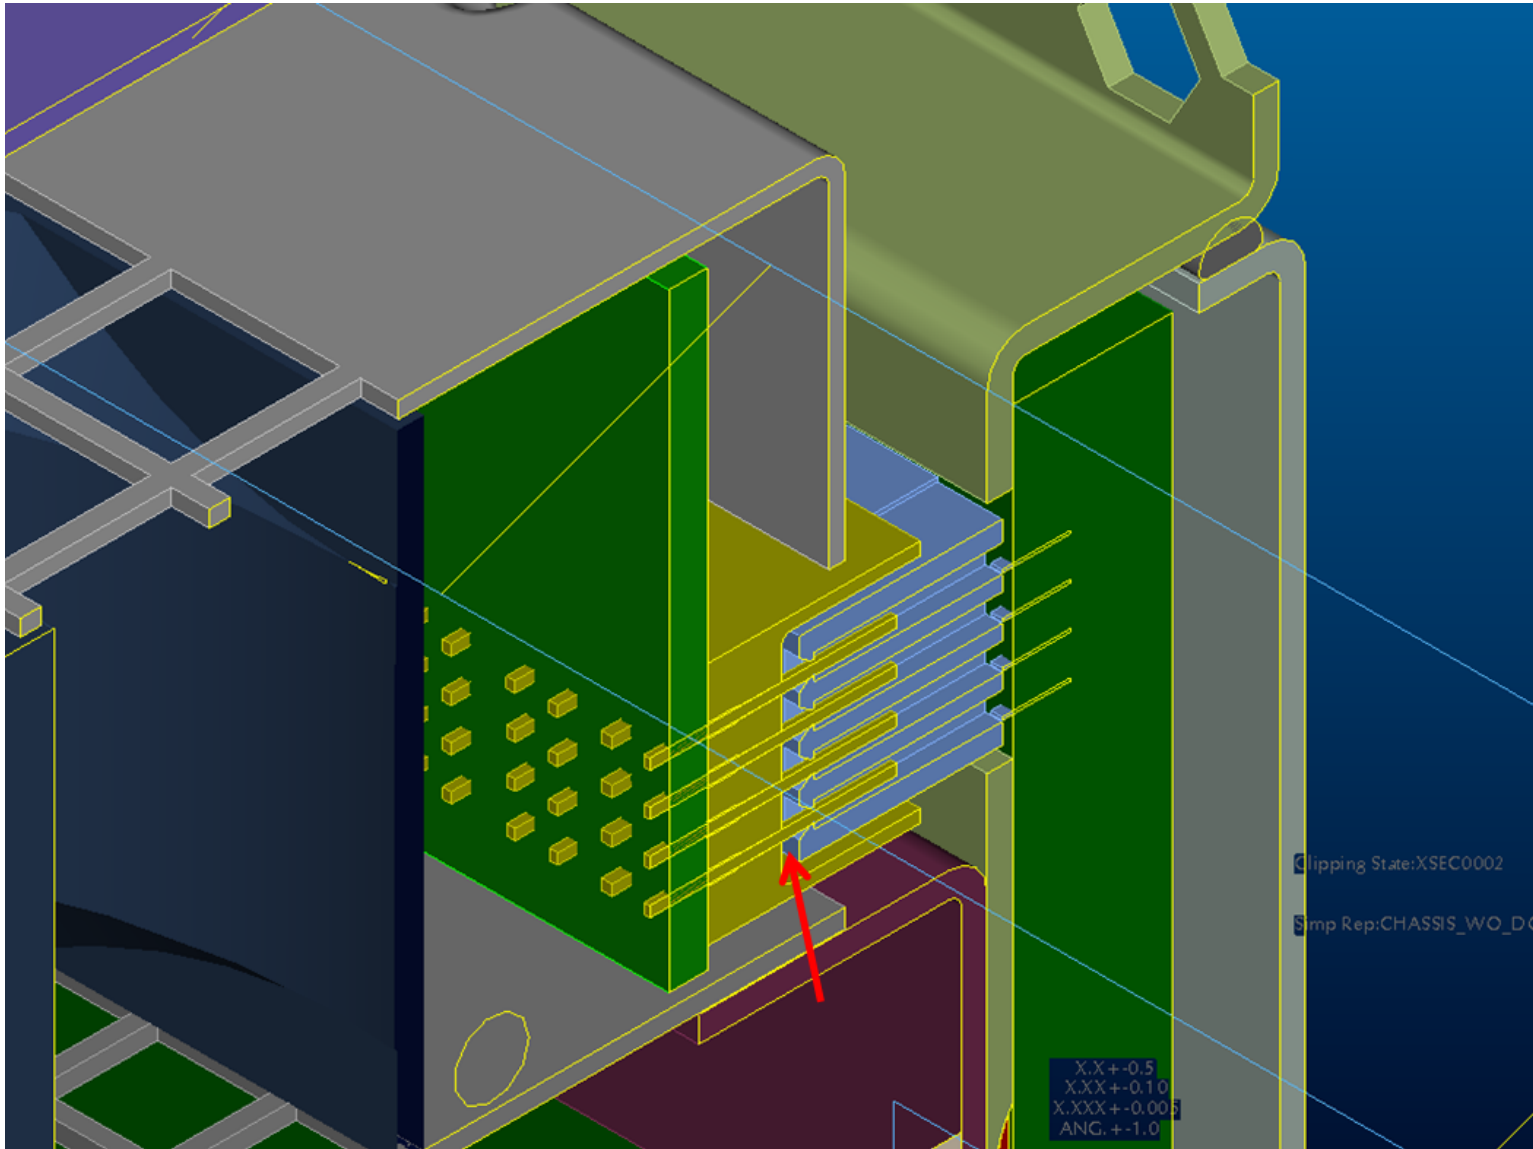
GEN1 Fan Unit to Shelf Tolerance Analysis - Connector Gap Section View
